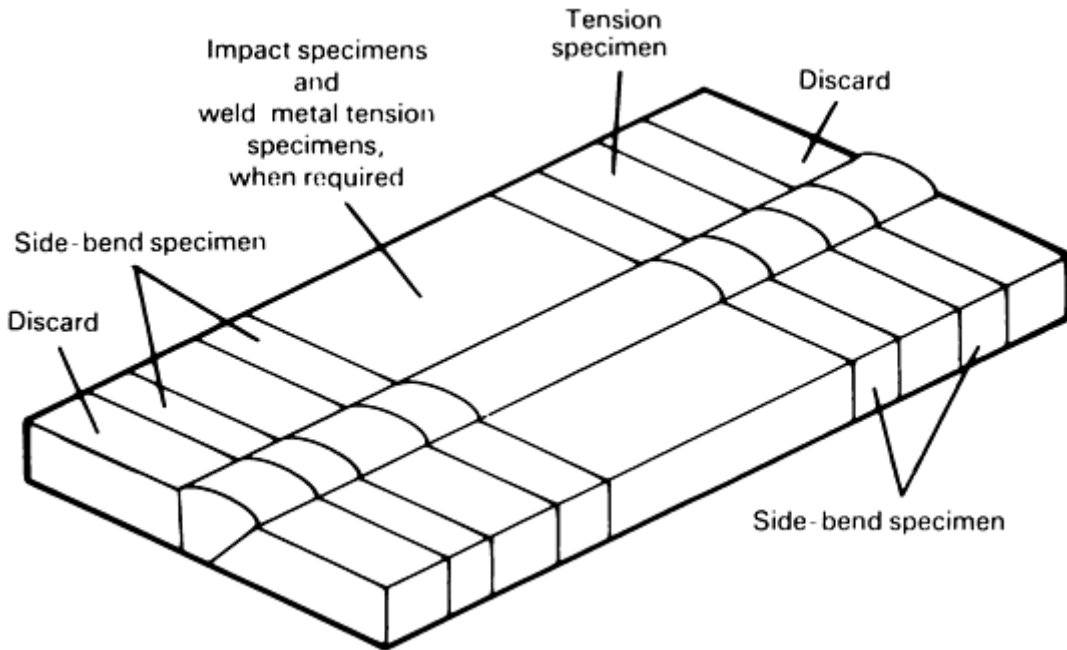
TYPICAL LOCATION OF TEST SPECIMENS FROM GROOVE WELDS IN BUTT-JOINT TEST PLATE
